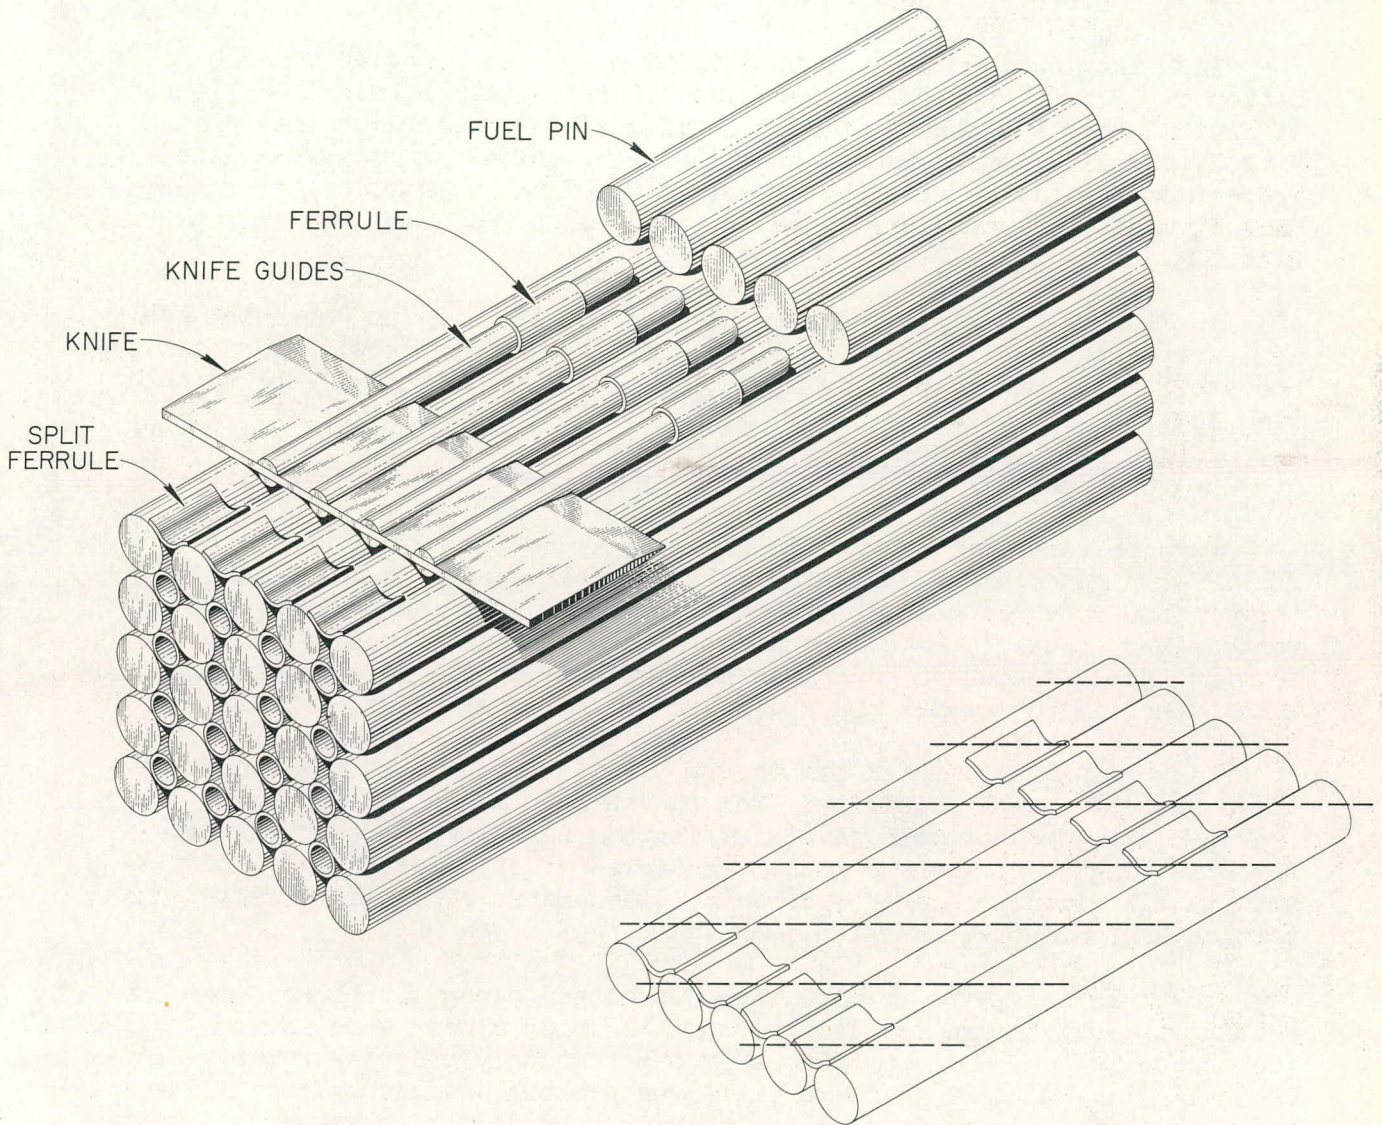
Ferrule Splitting Tool for Separating Individual Tubular Elements from a Fuel Assembly.
